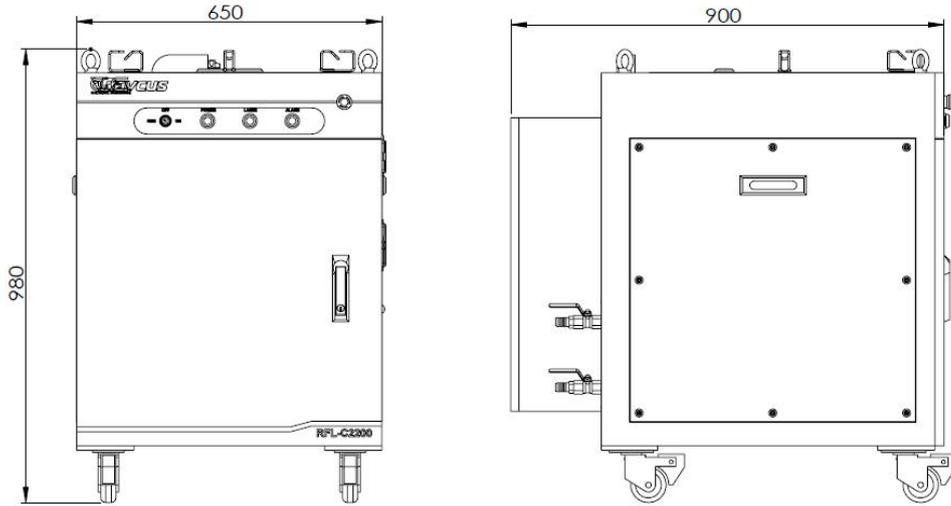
(a) Dimensions of 1500/2200W Product (unit:mm)
